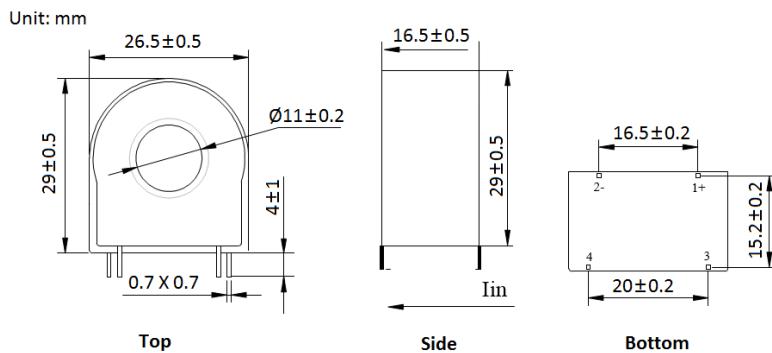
Dimensions of the CT Strip's Solid-Core CT
